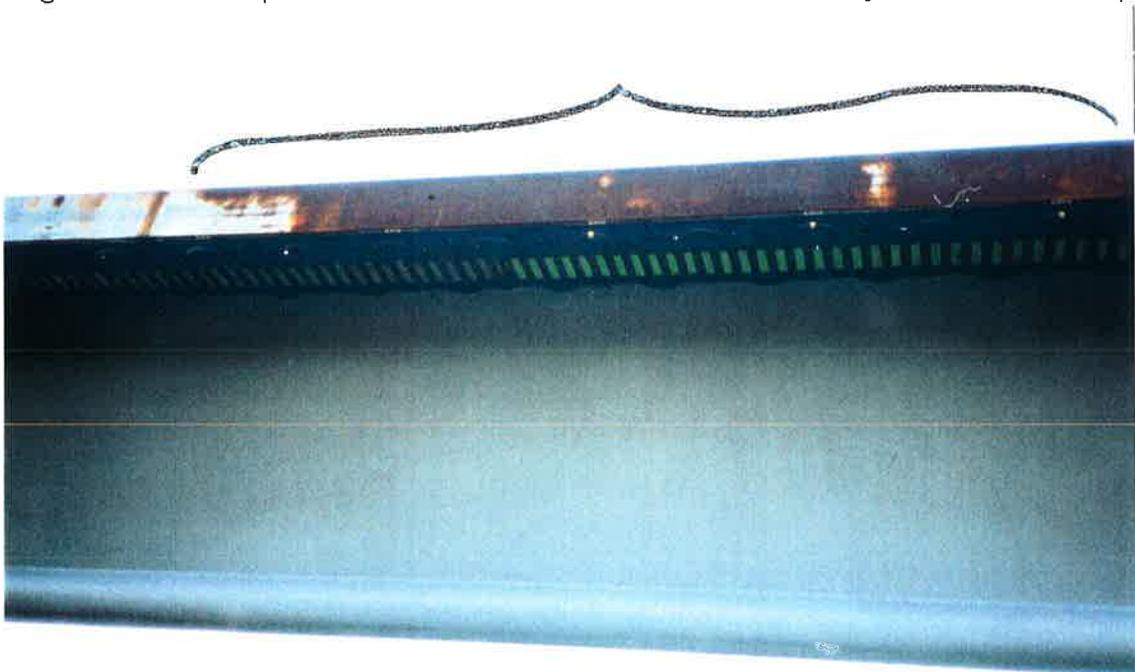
C-Channel Clamp Proposed To Retain Adjacent Stator Packs
